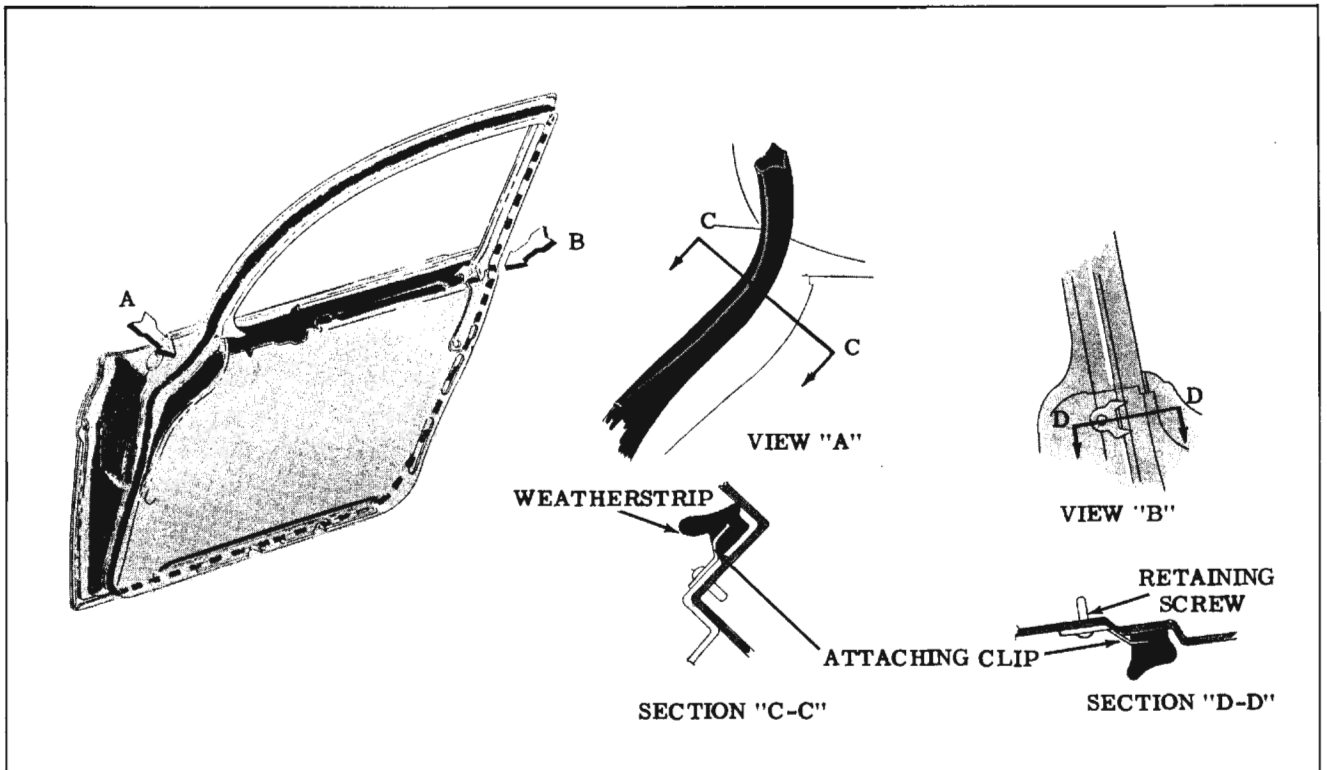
Two Prong Weatherstrip Attaching Clip (Front Door Shown-Rear Typical)
